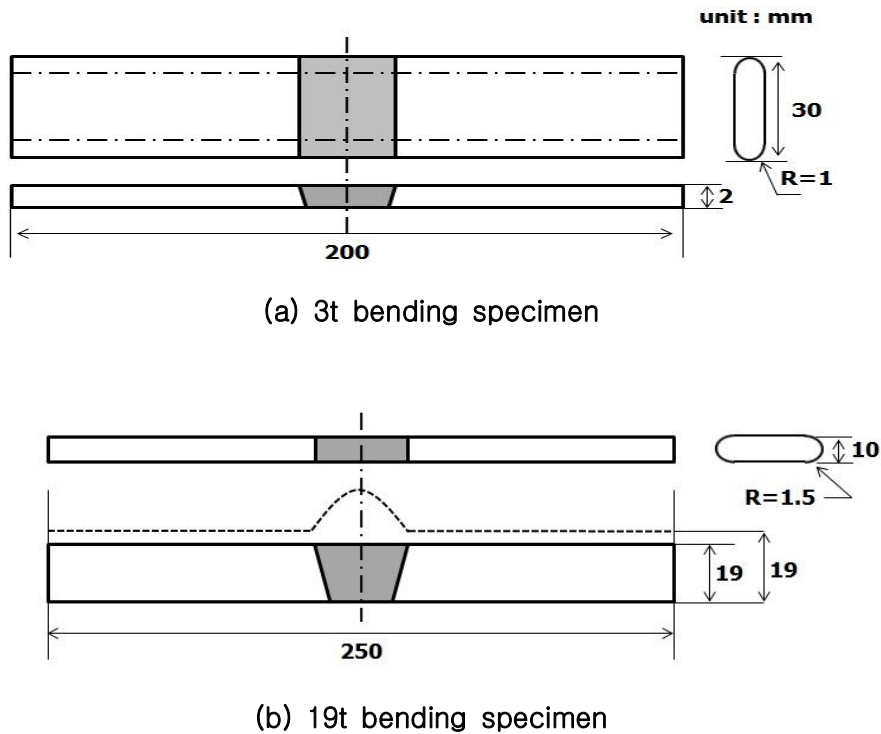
Dimension of bending test specimen (3mm and 19mm)
